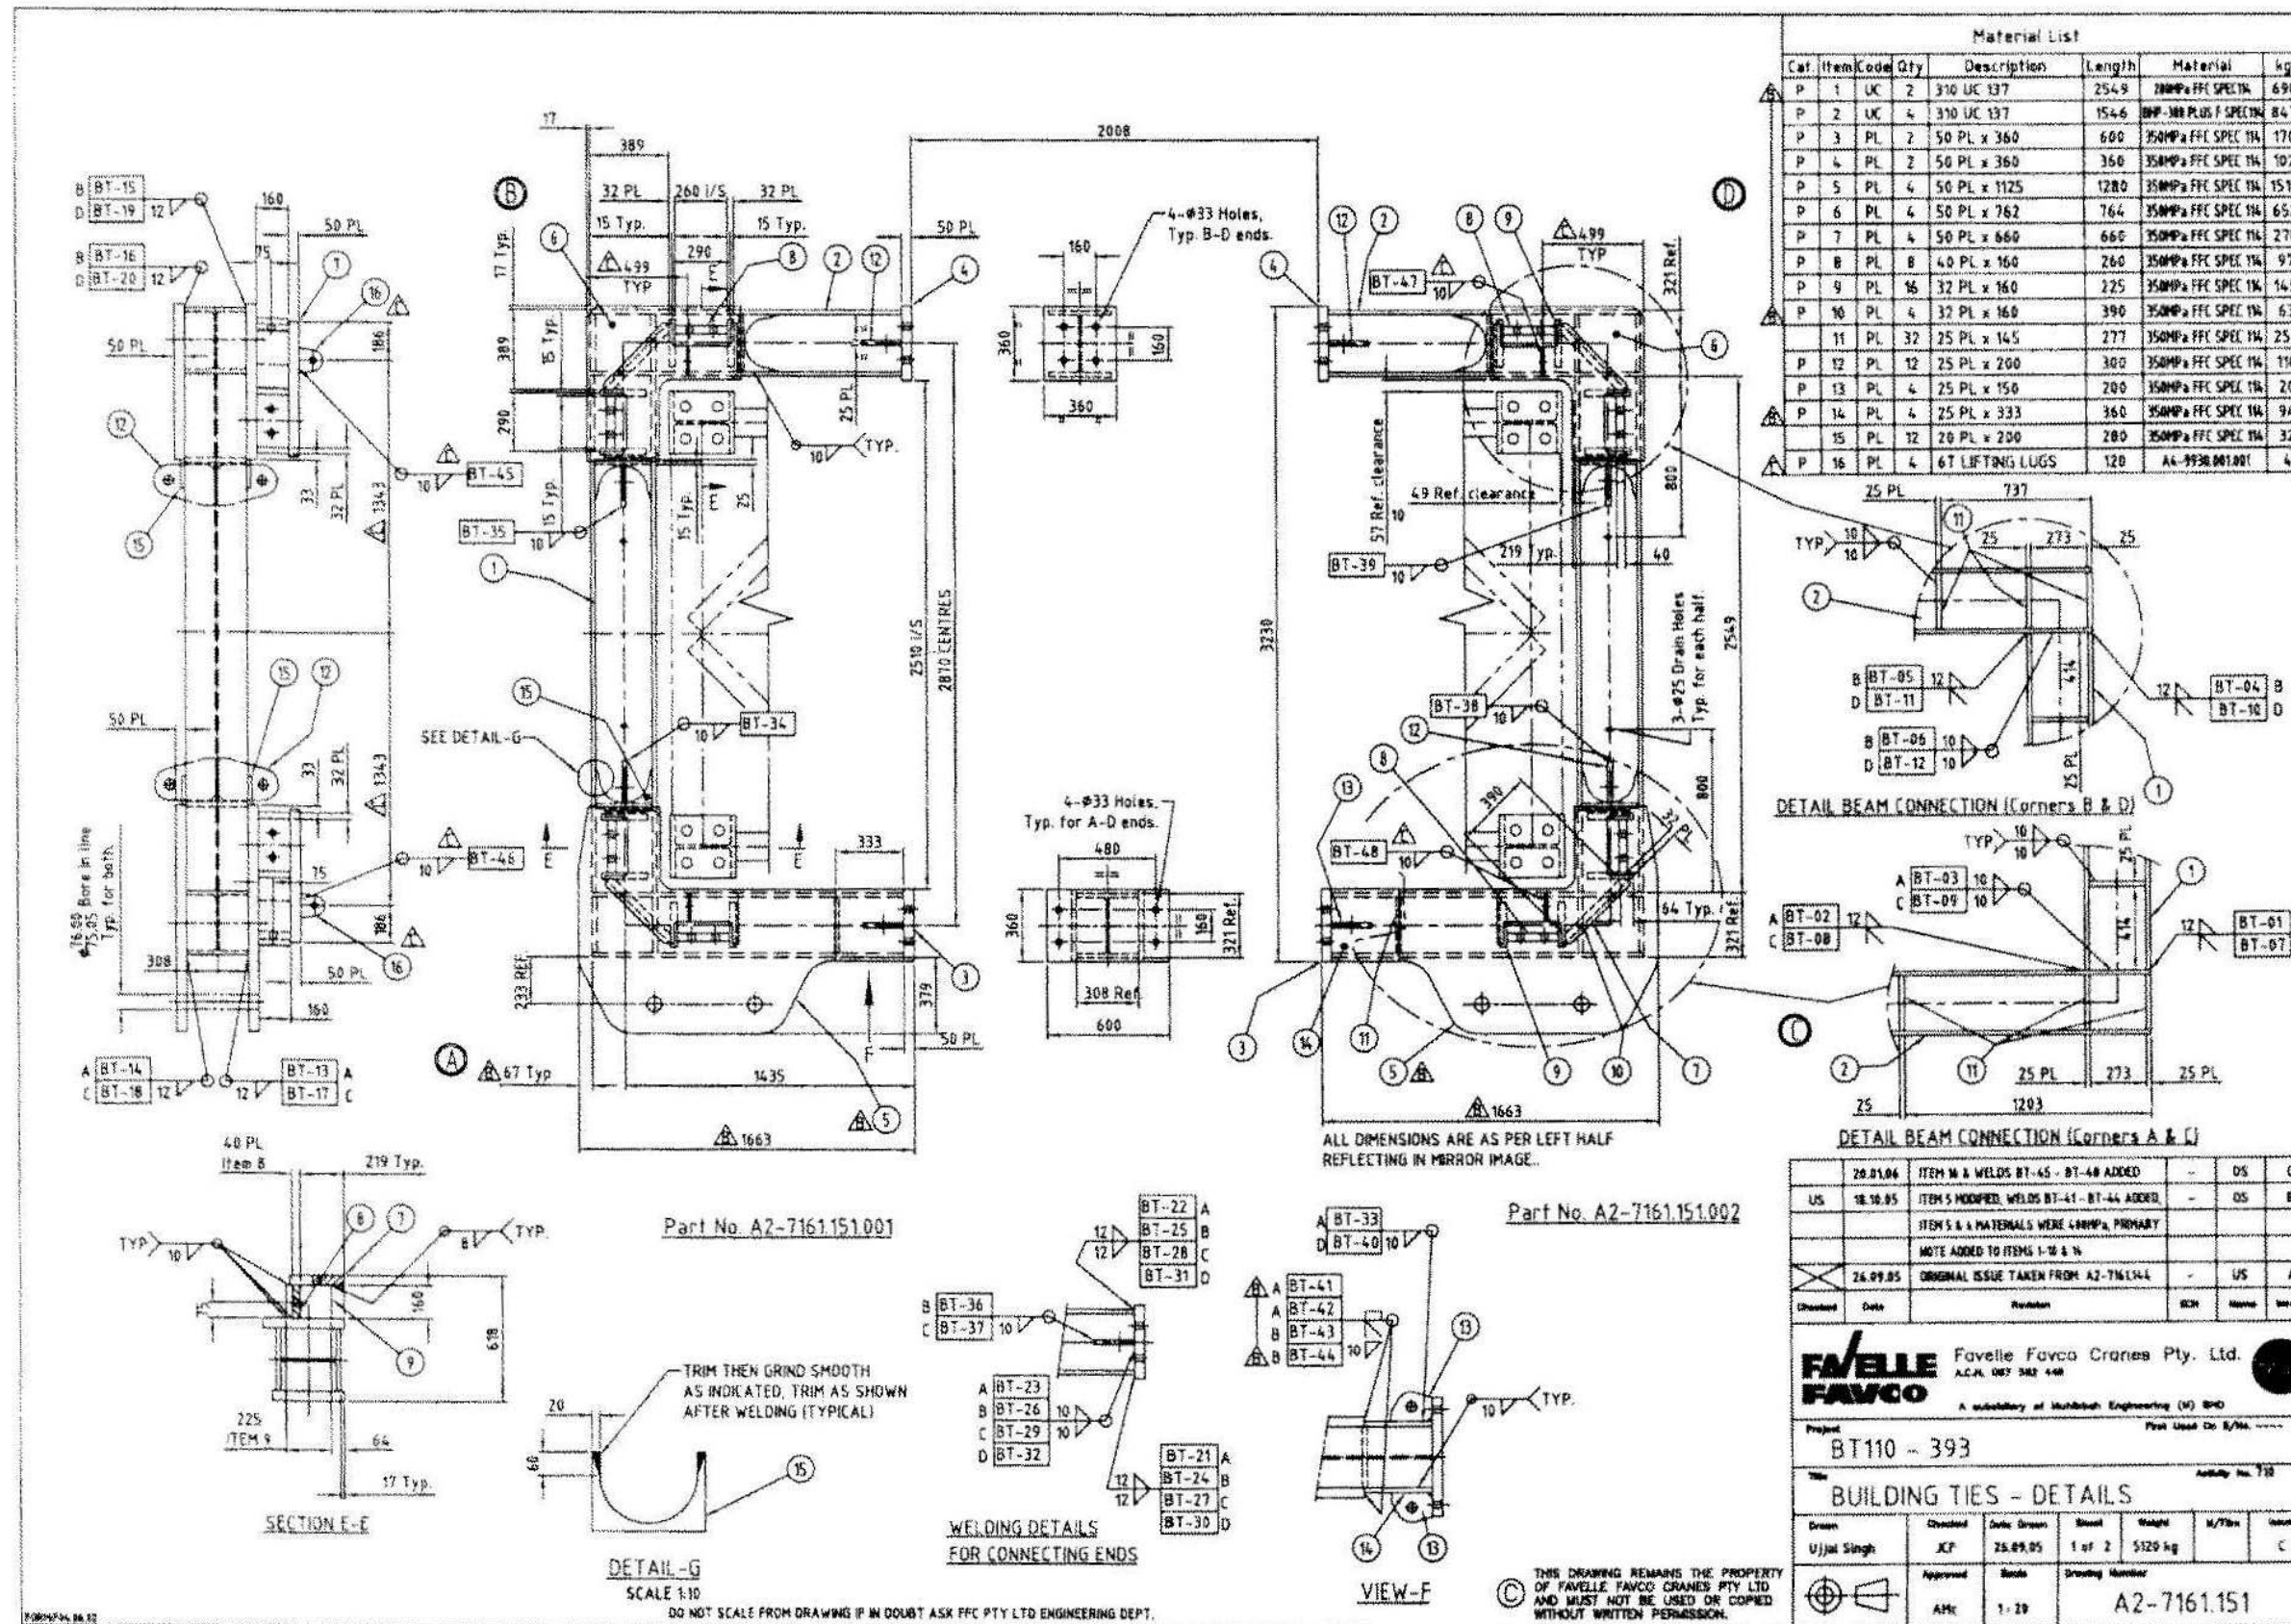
Favelle Favco Cranes Pty. Ltd Dwg. A2-7161.151 – Building Ties-Details. Favelle Favco drawing A2-7161.151.
